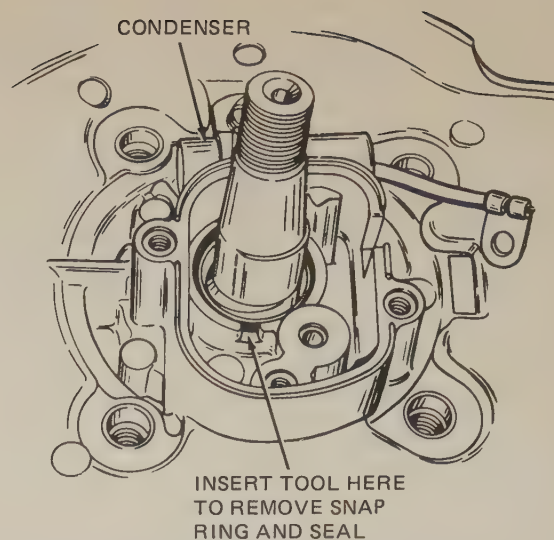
Point at which tool must be inserted to remove snap ring. (Tecumseh Products Company)
